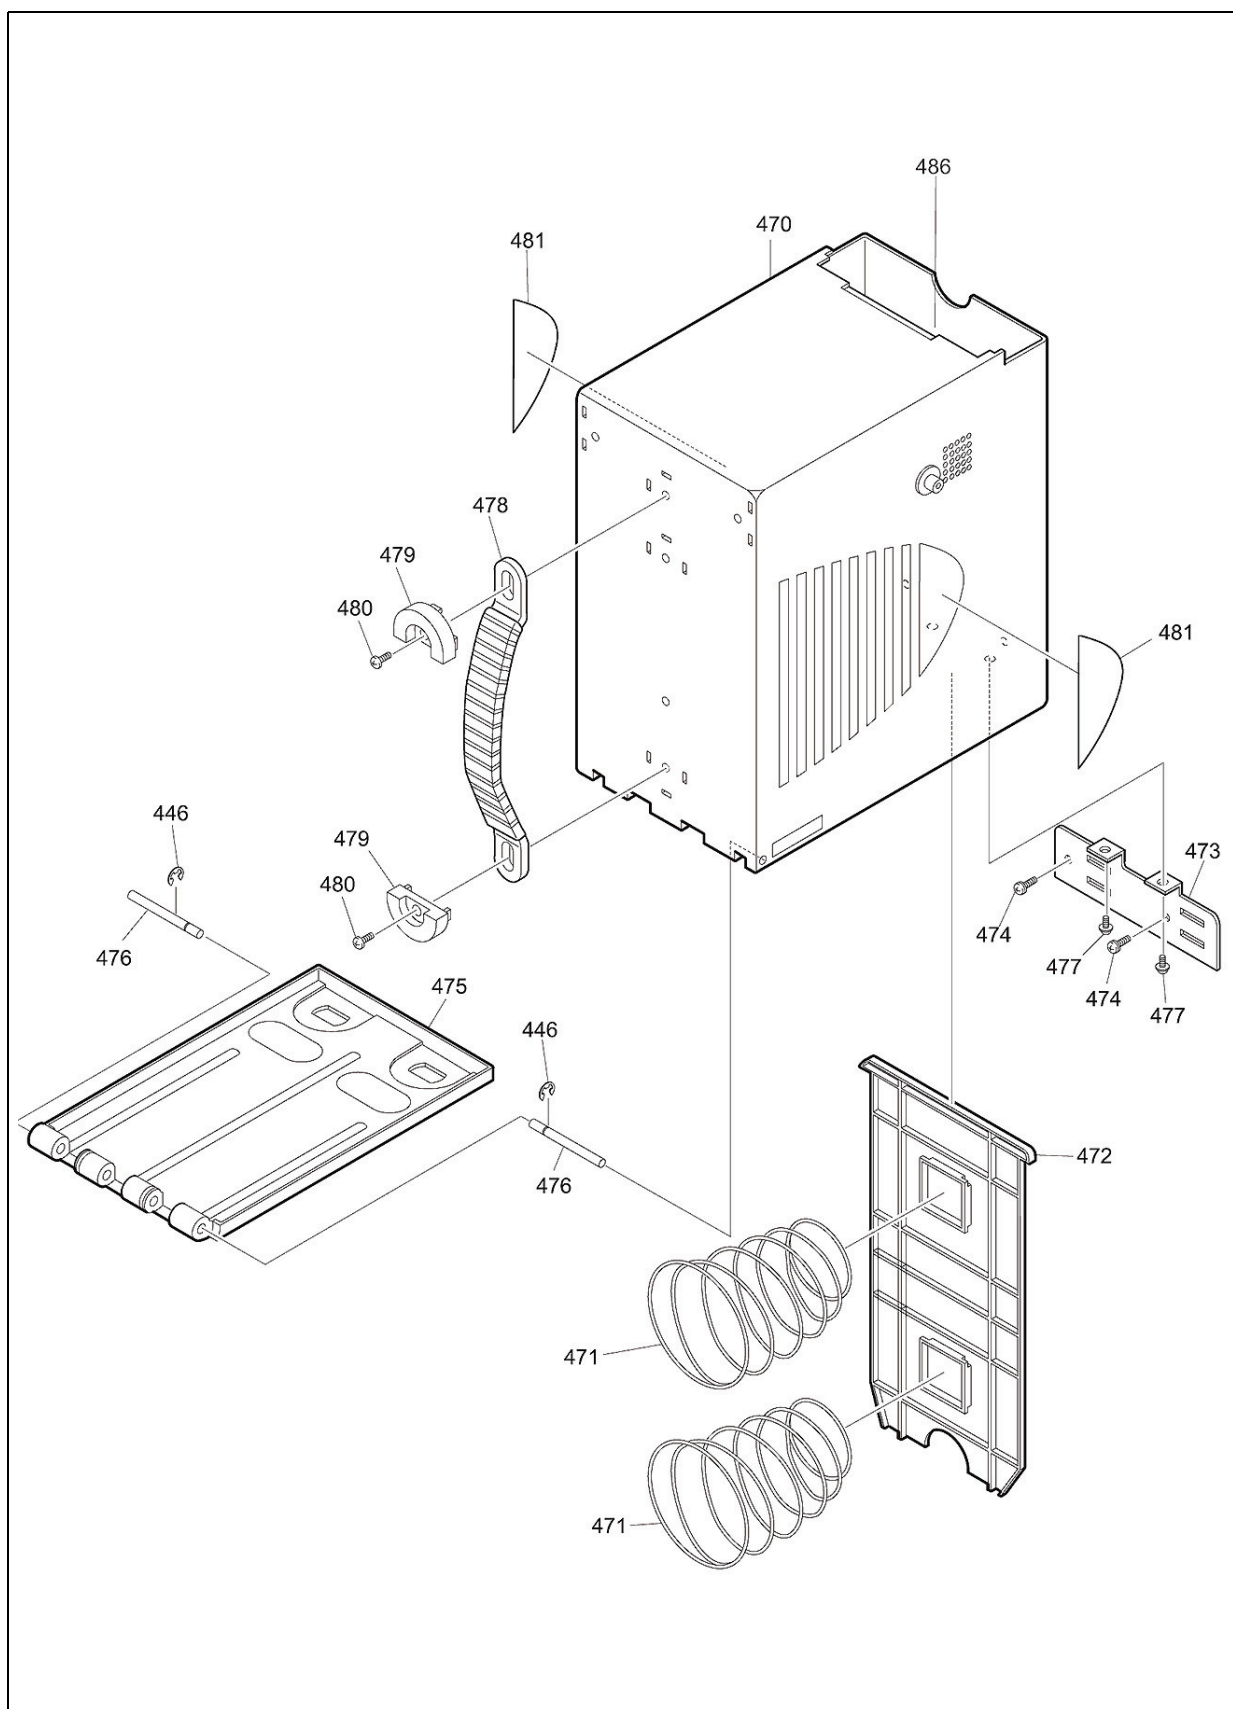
Standard Cash Box Unit Exploded View (Part 3)
